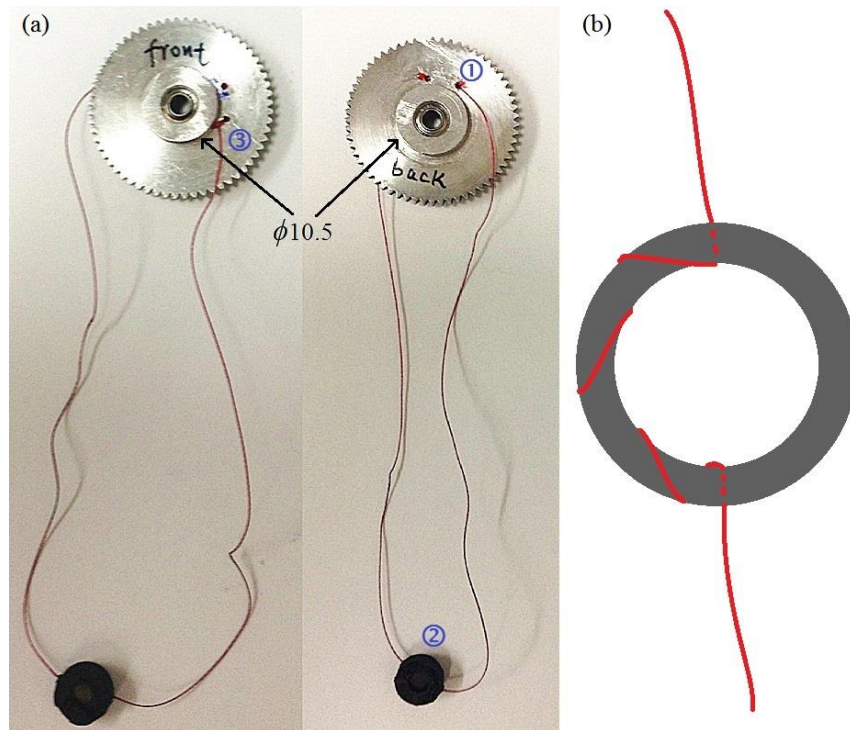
(a) Prototype of the gear-spool-cable mechanism with installation sequence. (b) Cable winding method for the shaft carriage.
